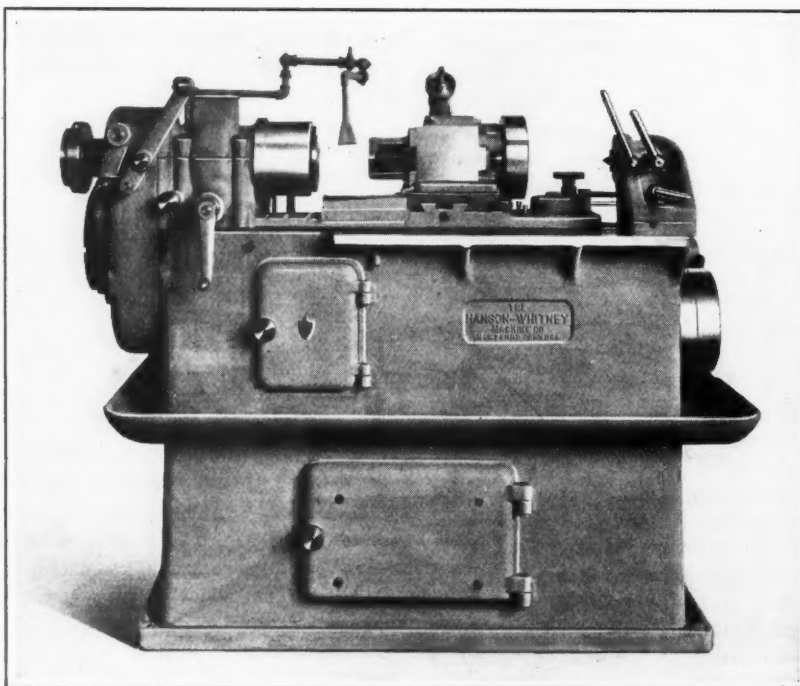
Hanson-Whitney Semi-automatic Universal Thread Milling Machine
